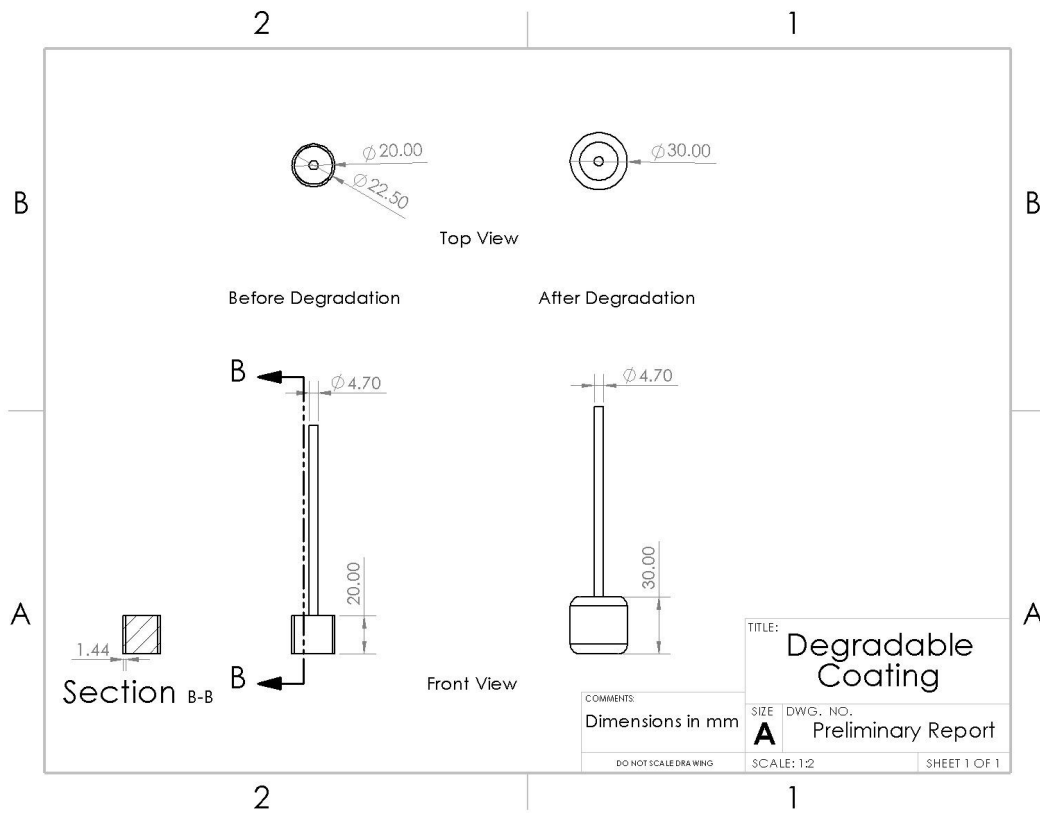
SolidWorks technical drawing of the Degradable Coating Design.
